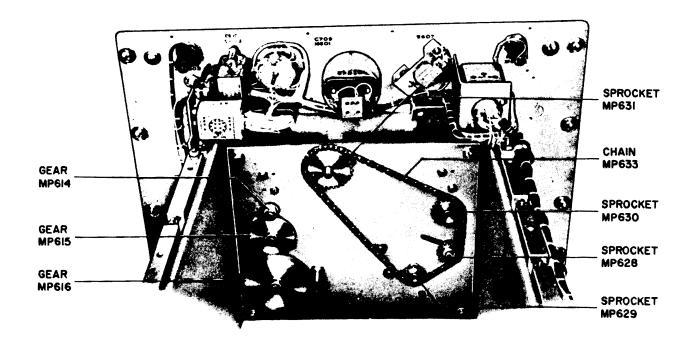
Electrical Frequency Control C-2764/WRT-2 Interpolation Oscillator, Replacement of Parts on Gearbox Back Plate
